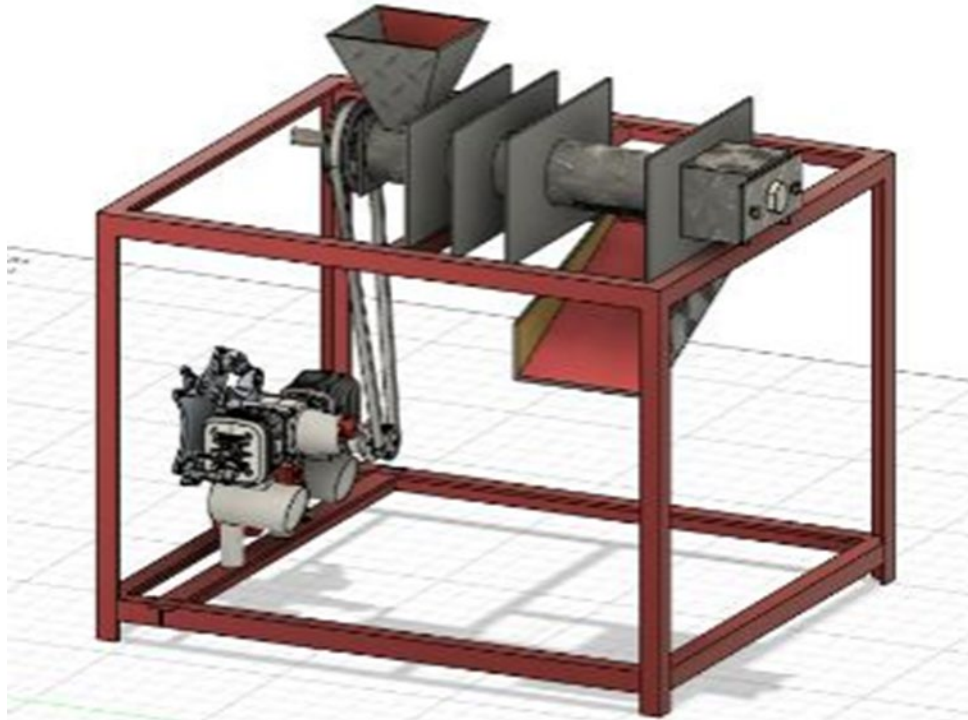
Isometric view of Cashew Nut Shell Liquid CNSL Extractor Design
